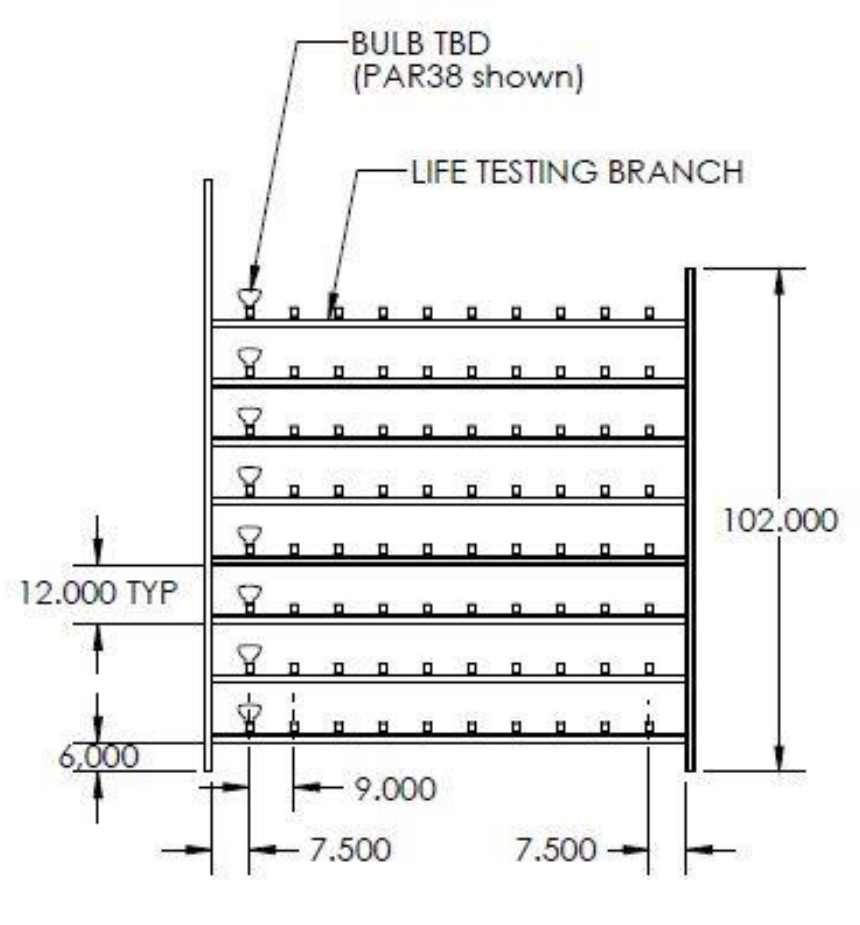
shows the test rack used for life testing. It consists of a physical array of sockets mounted on Unistrut that power and support the lamps, control hardware, and measurement devices.
